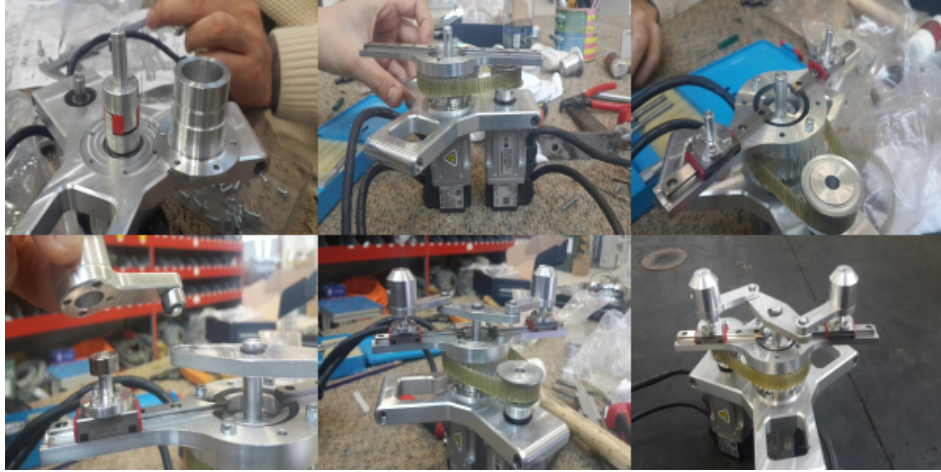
Assembly of the mechanical parts of the 2-DOF gripper.
